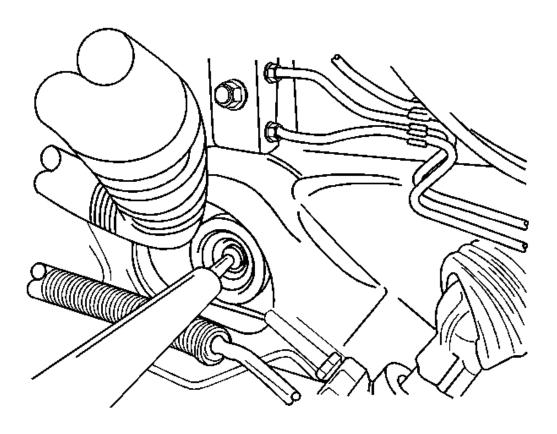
View Of Steering Cable Retainer On Steering Column Courtesy of GENERAL MOTORS CORP.
